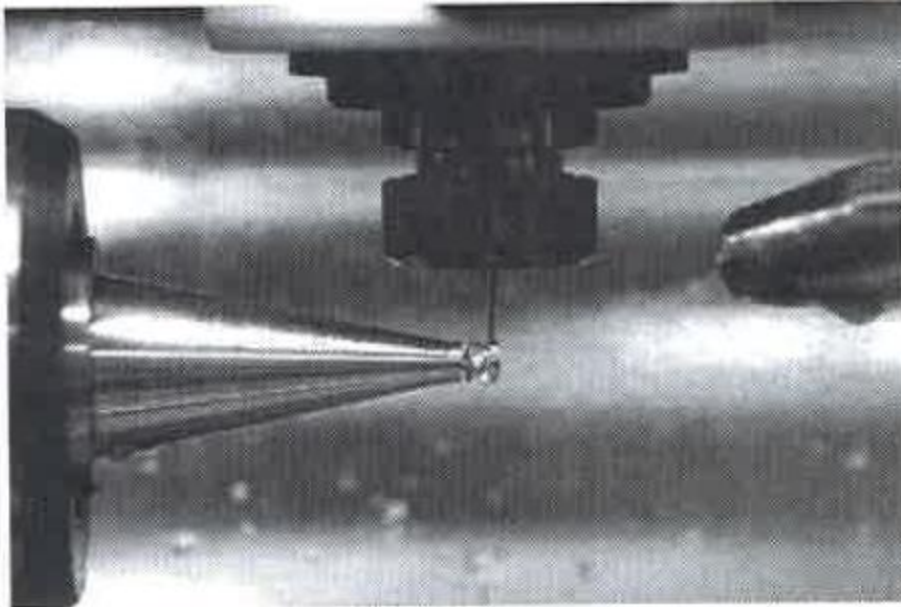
Rotor on milling with 1 mm radial mill during production
